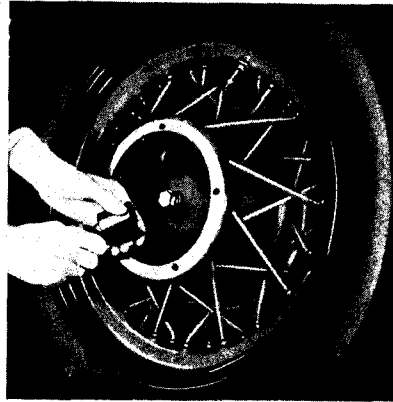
The bolt head and wheel clamp are accessible after the lock has been removed.
